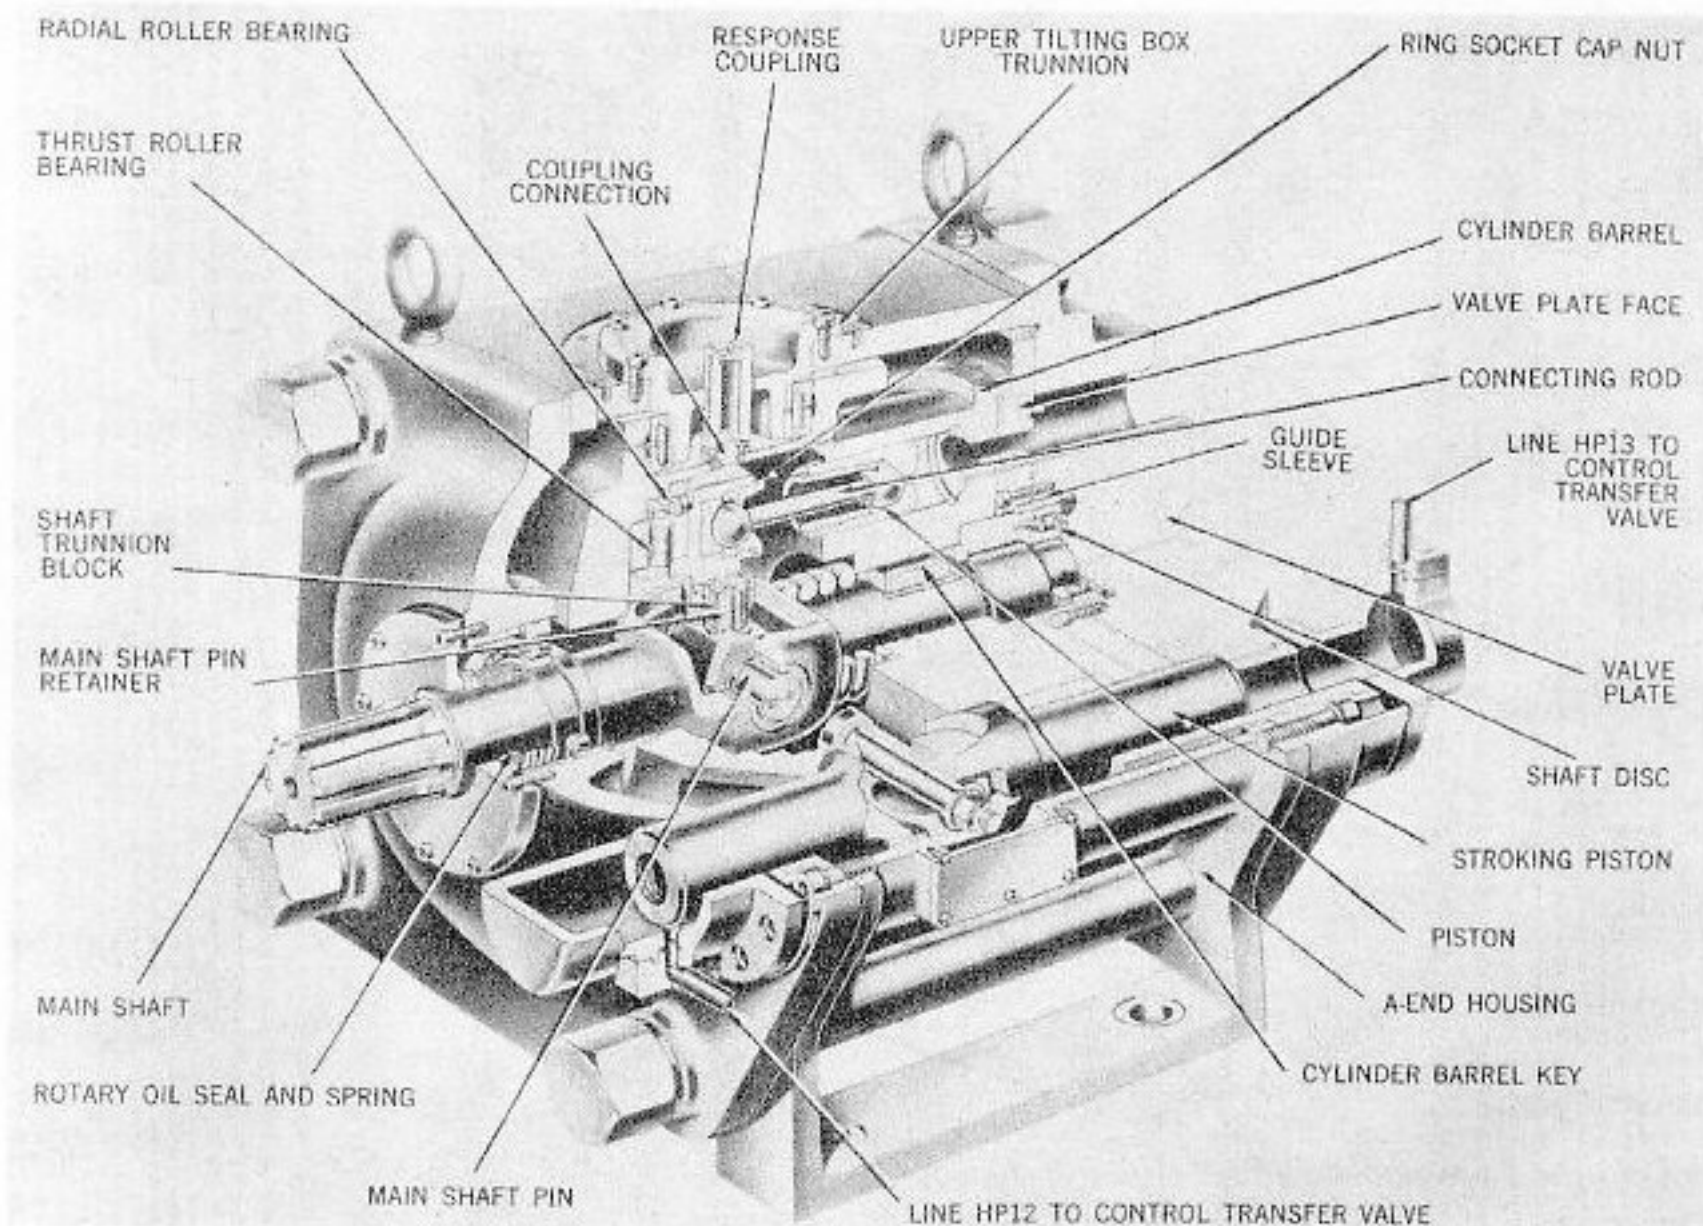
Training Gear A-end Assembly, Cutaway View
